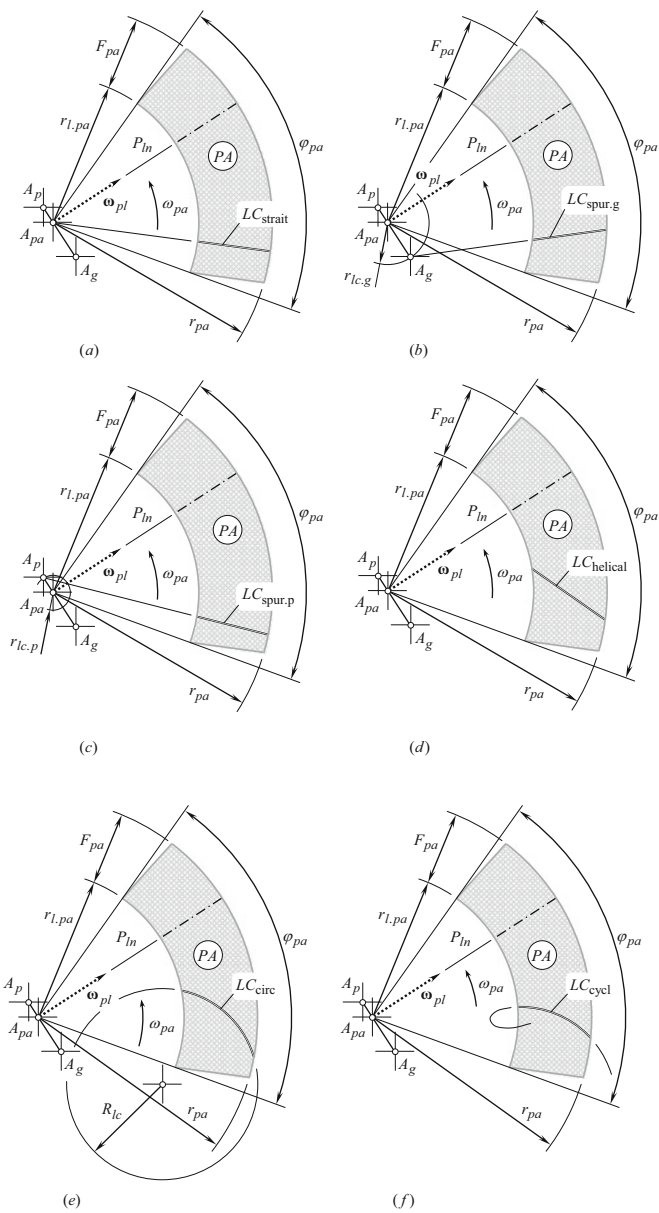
Examples of possible geometries of the lines of contact, LC , between a gear tooth flank, G , and a mating pinion tooth flank, P , in perfect crossed-axes gear pair: (a) “pseudo-straight crossed-axes gears”, (b) “straight-gear crossed-axes gears”, (c) “straight-pinion crossed-axes gears”, (d) helical crossed-axes gears, (e) spiral crossed-axes gears, and (f) cycloidal crossed-axes gears. (Adapted from: Radzevich, S.P., Theory of Gearing: Kinematics, Geometry, and Synthesis, 2nd Edition, revised and expanded, CRC Press, Boca Raton, FL, 2018, 934 pages.)
